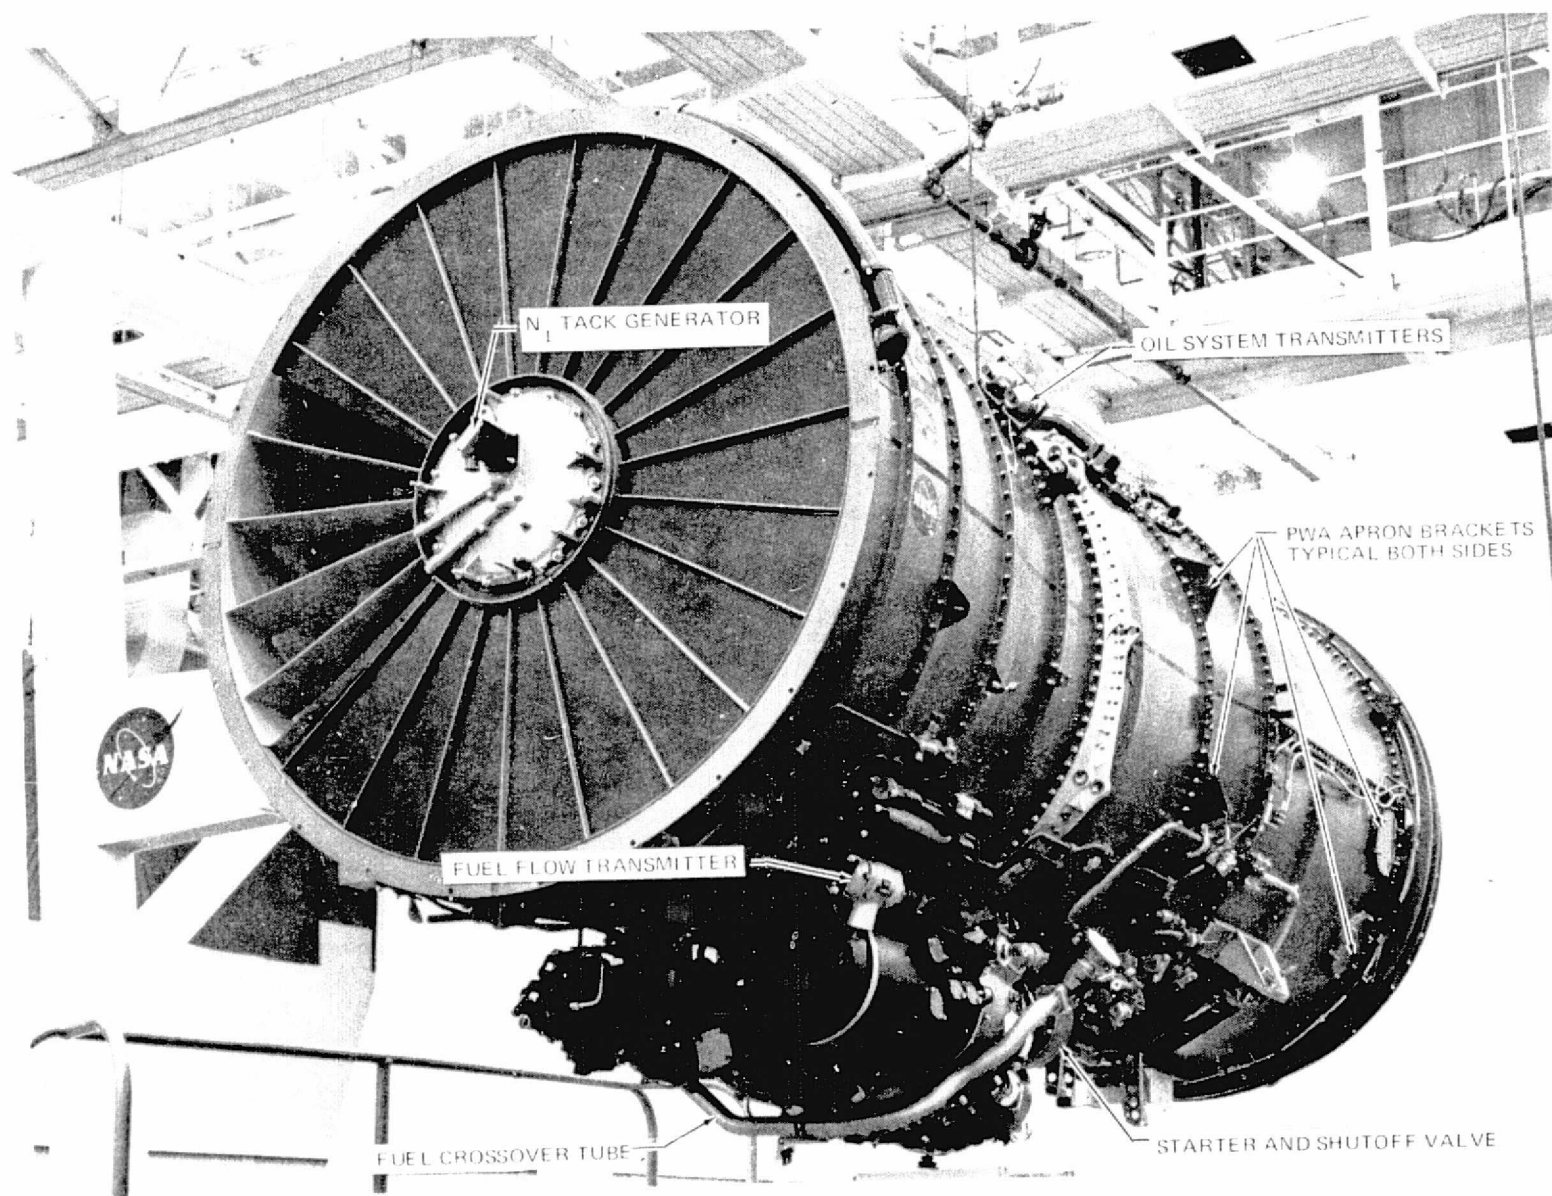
MOCKUP ENGINE - LEFT SIDE
